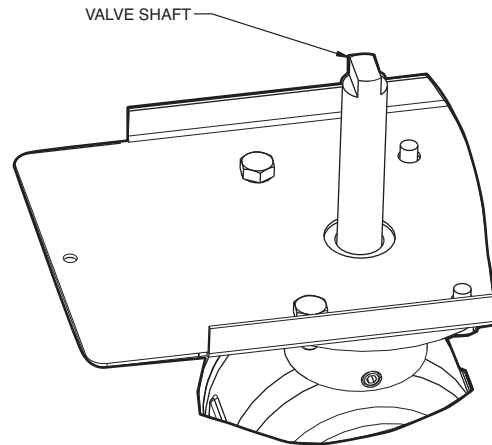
Fully Open Ball Valve with Actuator Removed
